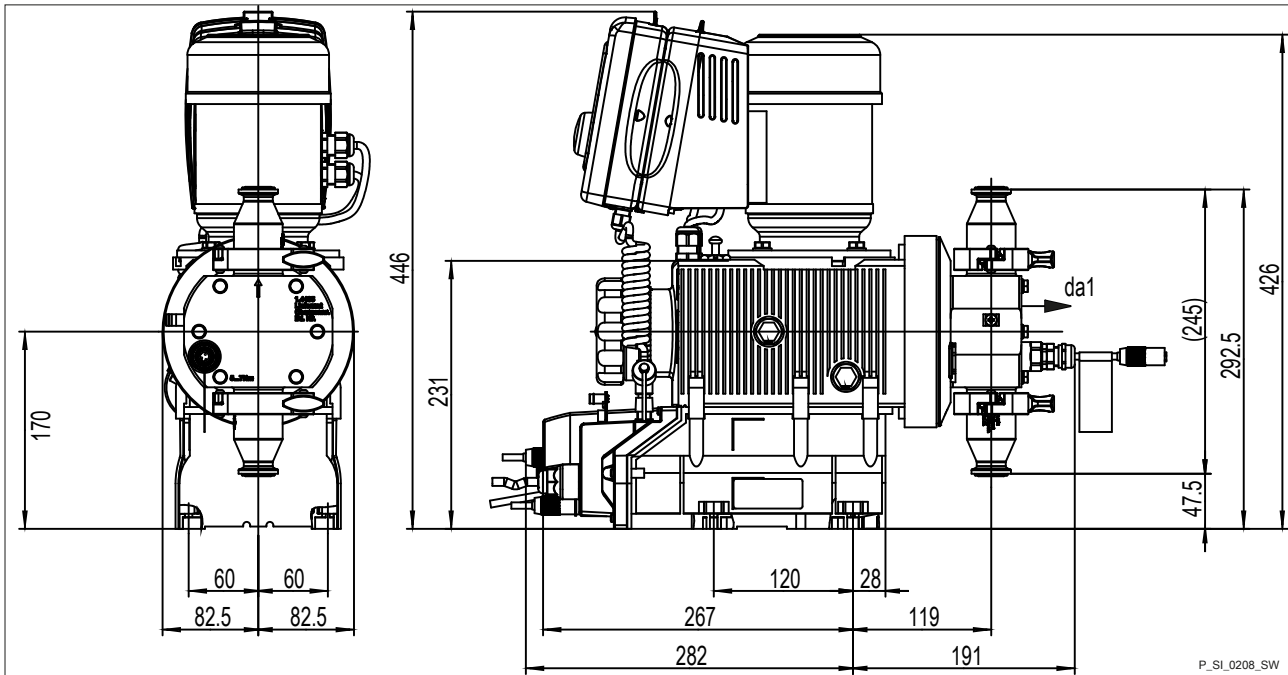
Dimensional drawing of the Sigma 2, S2CB with hygienic pump head DN15, dimensions in mm
